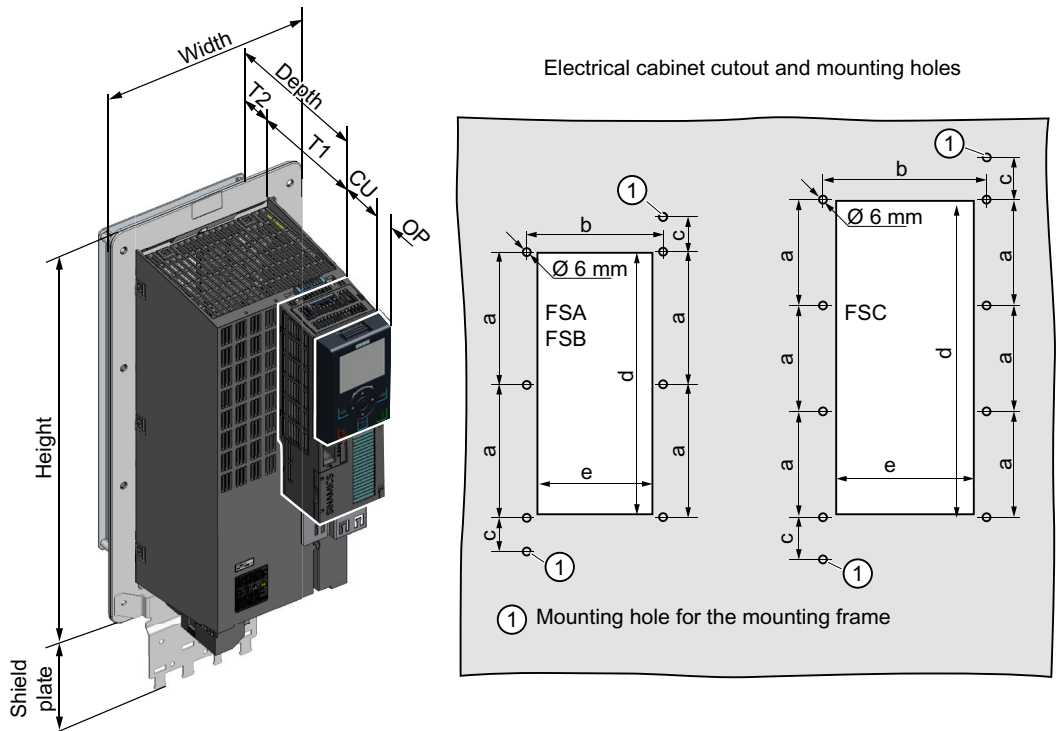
Dimension drawing and drilling dimensions for frame sizes FSA ... FSC
